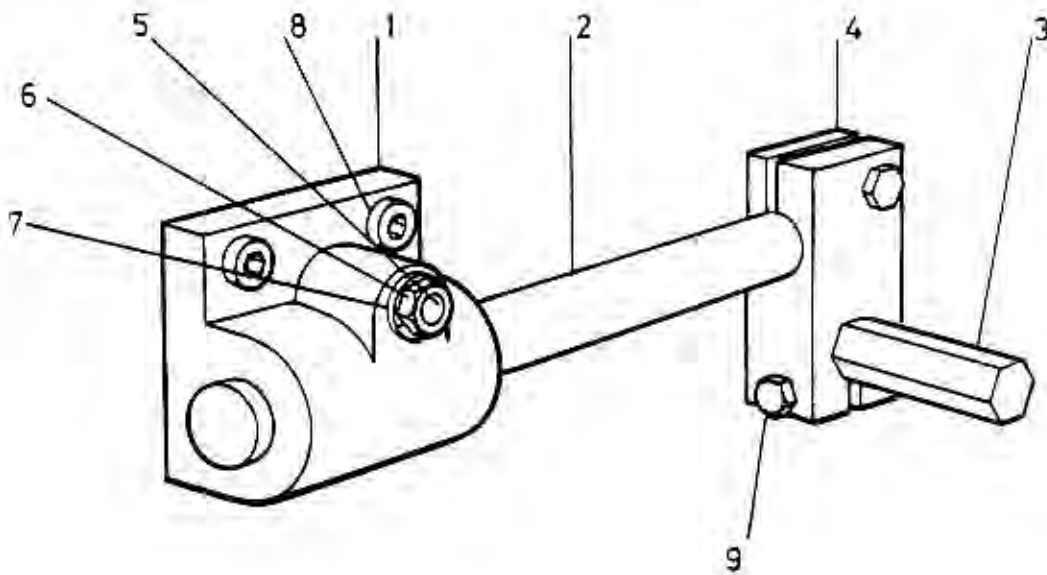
MOUNTING FOR TOP PAD OR ROLLER PRESSURE UNIT BEFORE TOP HEAD
